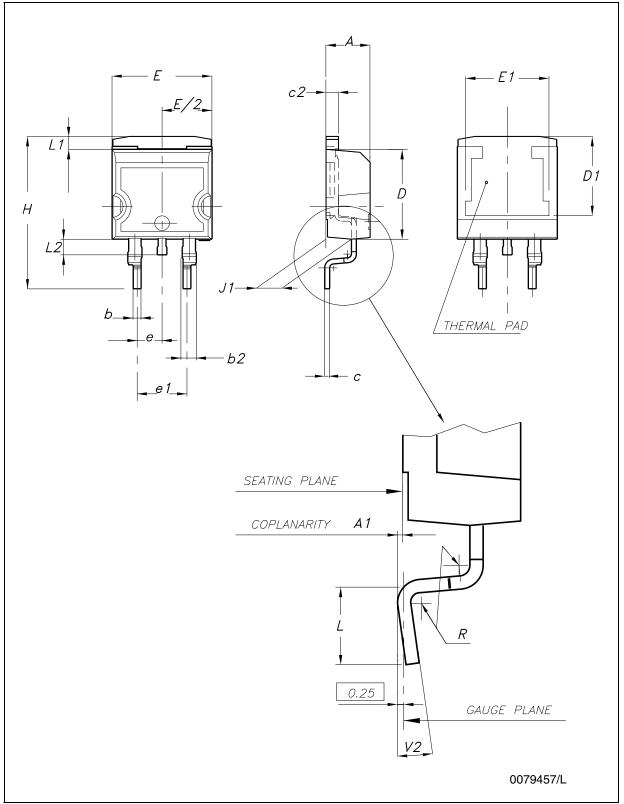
DRAWING DIMENSION D²PAK (TYPE STD-ST)
